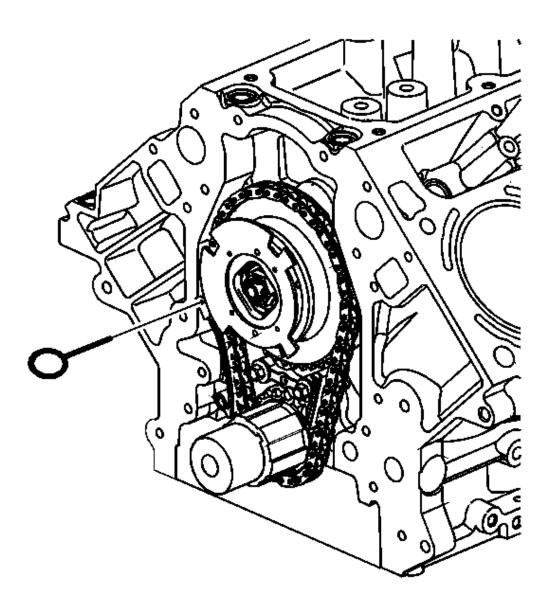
View Of Special Tool EN 46330 Courtesy of GENERAL MOTORS CORP.
